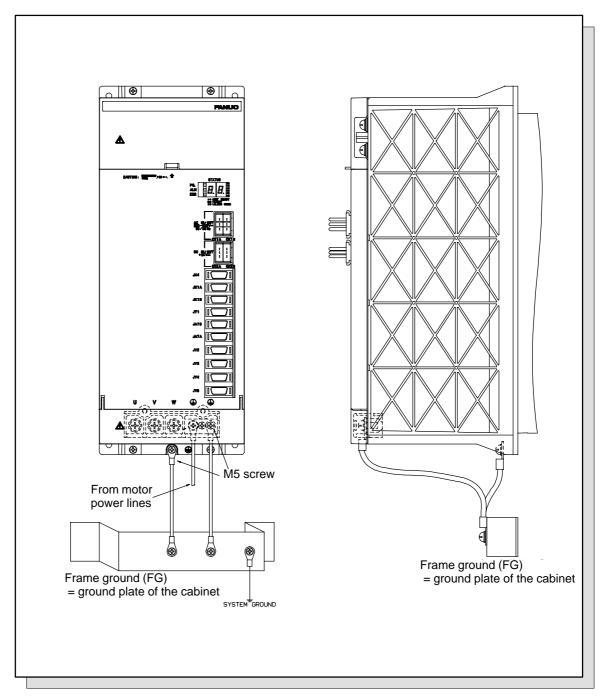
(m) Ground Cable Connection (SPM-15 to 30, 15HV to 45HV, SPMC-15 to 26)
